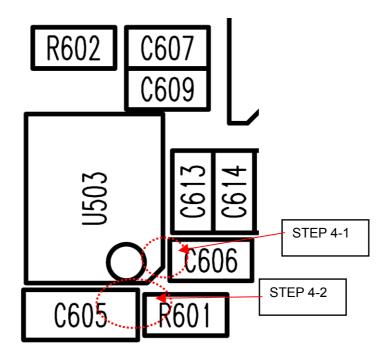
U503 VCTCXO Check Point on the PCB Layout
